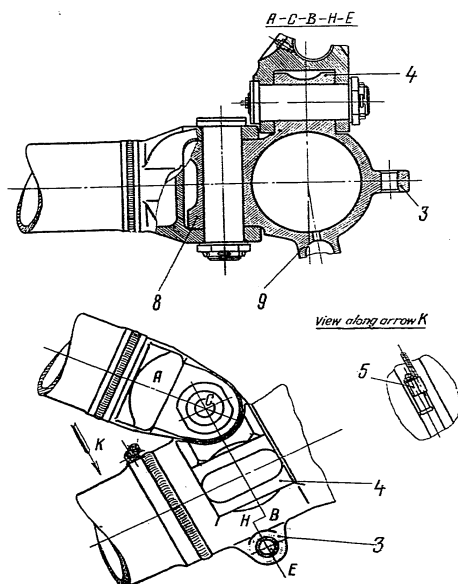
ATTACHMENT UNITS ON MAIN LANDING GEAR AXLE SHAFT
